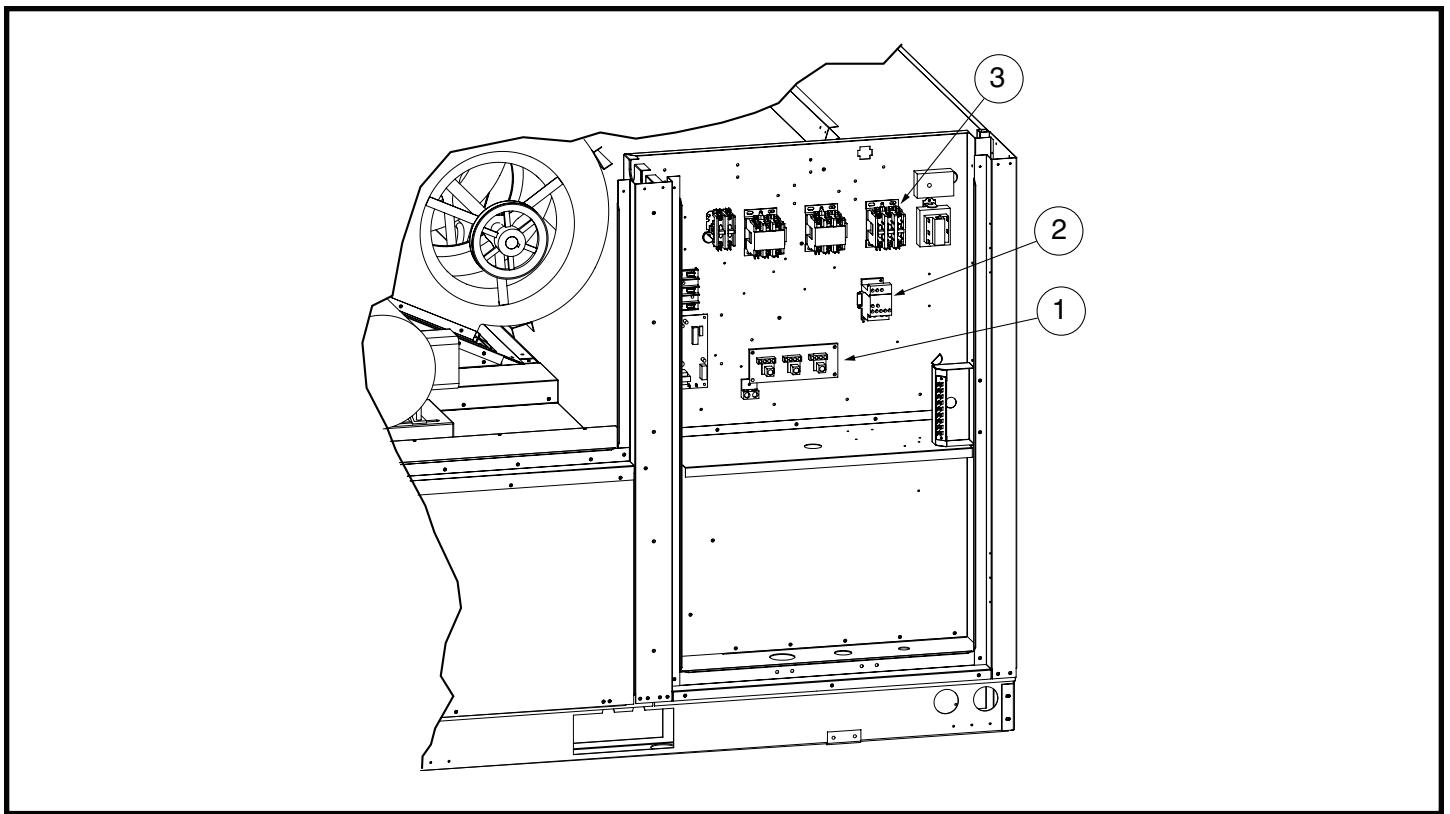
External Motor Overload Wire Routing - 12.5 Ton Units
